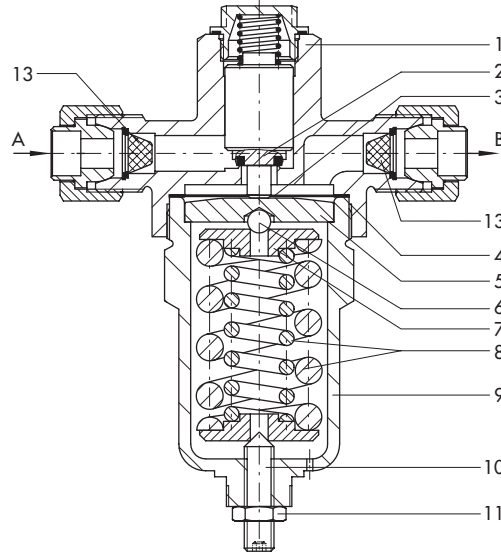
· Type 2357-1 Pressure Reducing Valve
